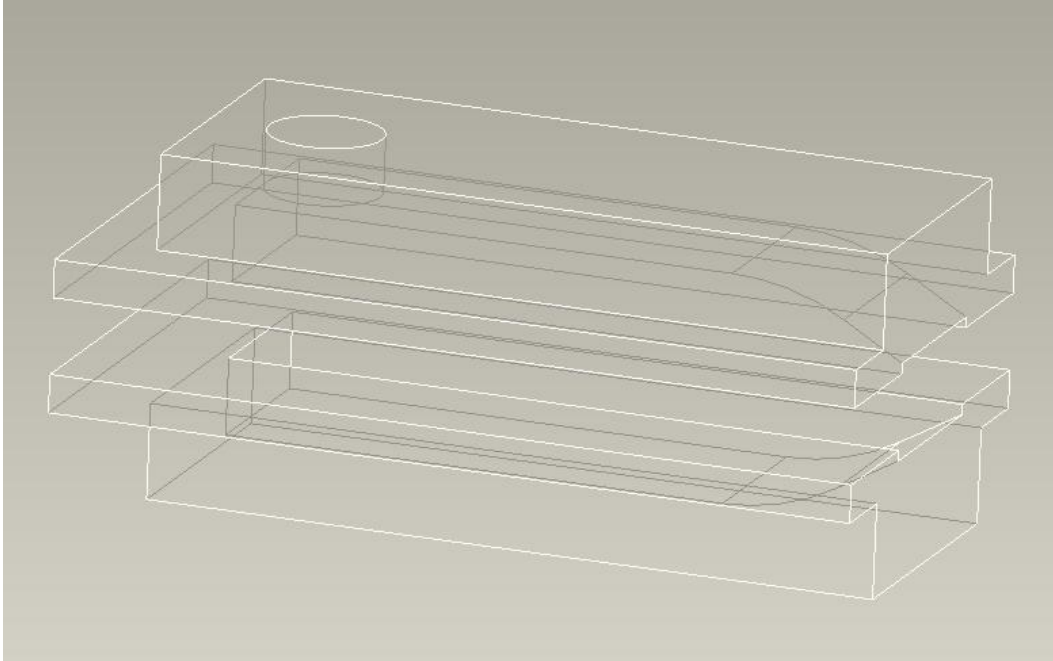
Nozzle Cut in Half and Welded back Together
